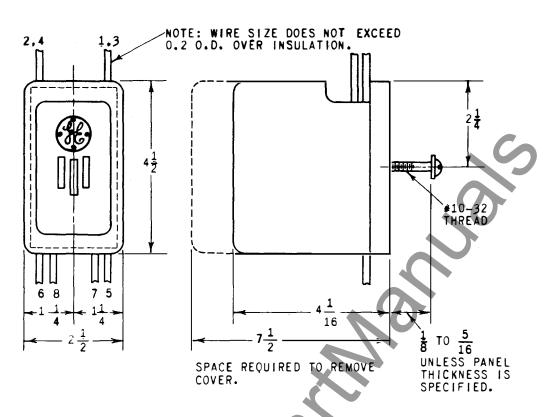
Outline Dimensions for Type HGHIIJ Relay.
